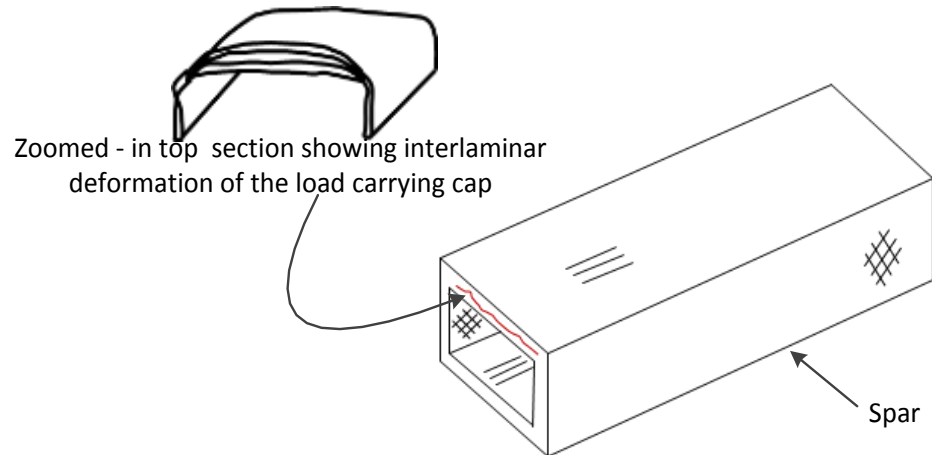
Crushing pressure on a wind turbine blade section adapted from [6].
